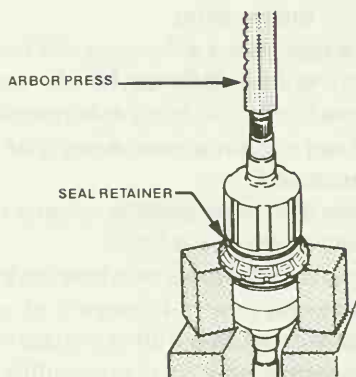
New seal retainer is replaced using the arbor press. (Chevrolet Motor Division of General Motors Corporation)
